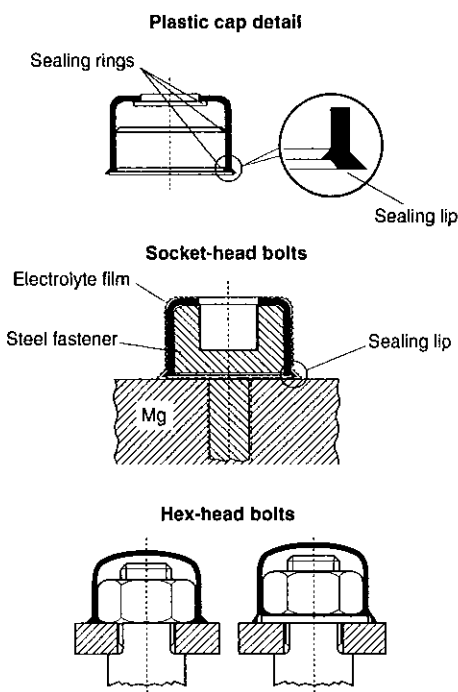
Use of molded plastic caps on socket-head and hex-head bolts to avoid galvanic corrosion. Source: Ref 24
